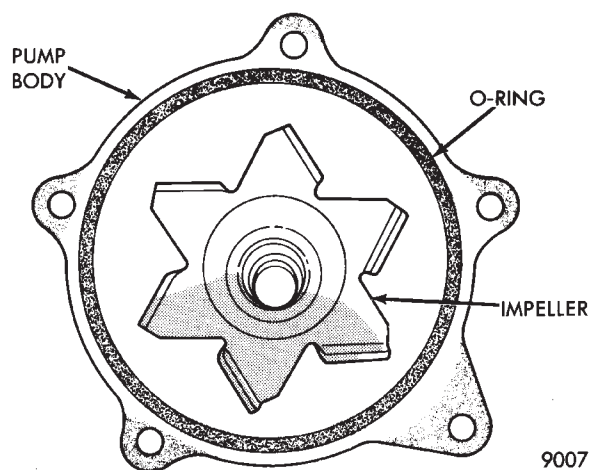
Water Pump—3.3L and 3.8L Engines
